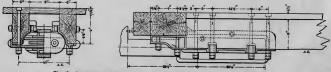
Application of Dayton Draft Gear. 80,000-Pound Cars.-C. B. & O. R. R.
